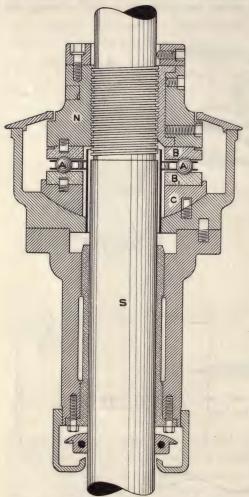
Vertical Suspension Ball Bearing (see page 256).\
